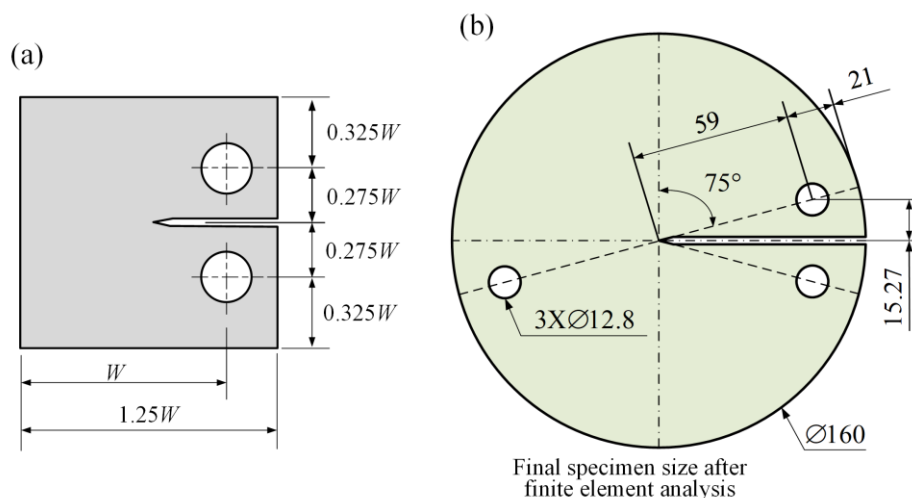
Comparison of dimensions of the standard CT specimen and the proposed specimen. (a) Dimensions of CT specimen. (b) Final dimensions of SECC specimen.
